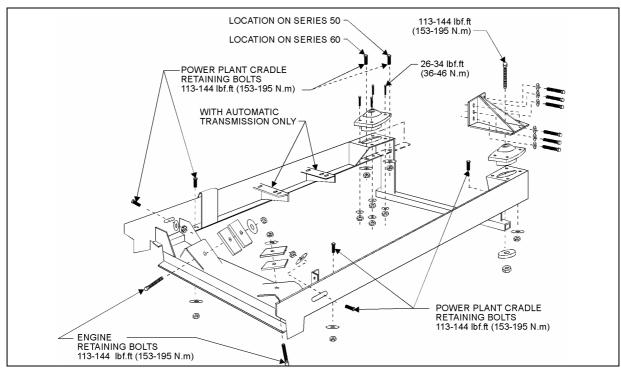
POWER PLANT CRADLE INSTALLATION
